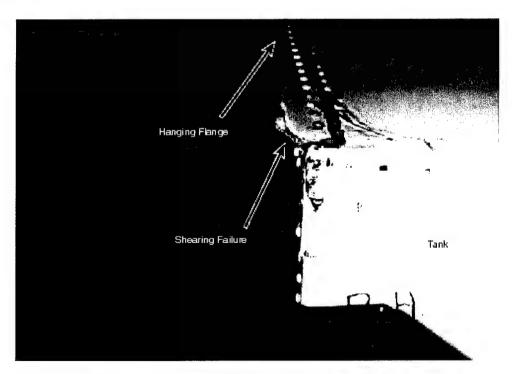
HANGING FLANGE SHEARING FAILURE
